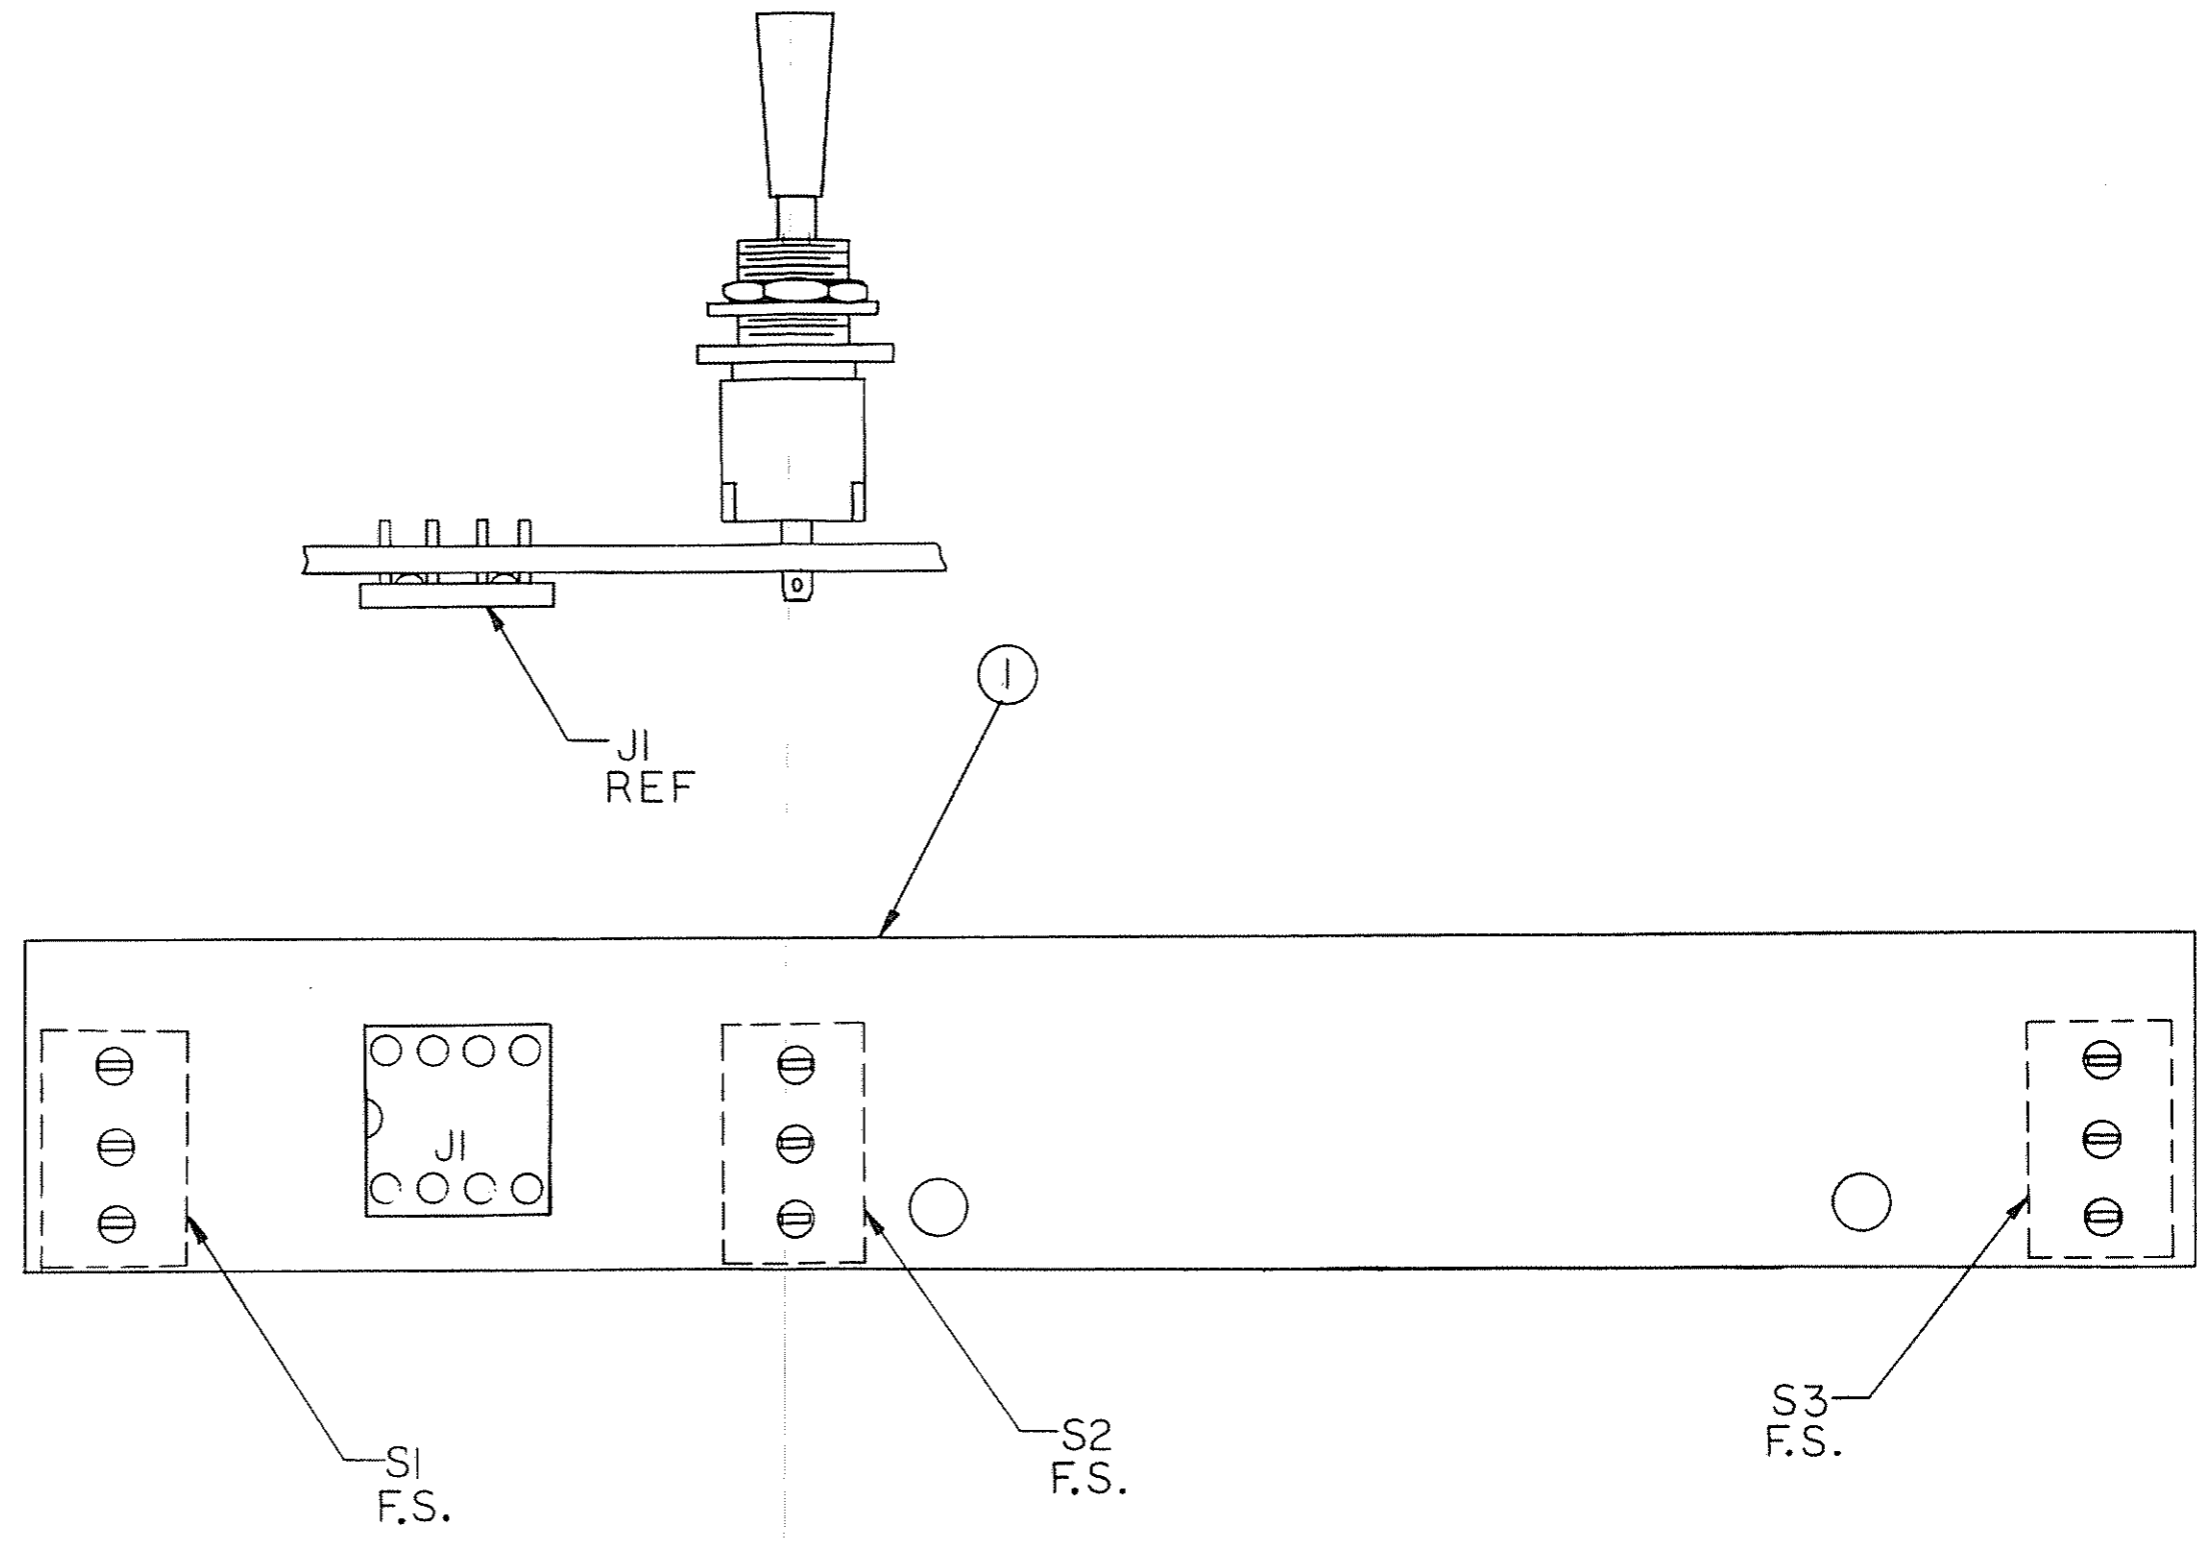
Front Panel A14 (01-80305A64) Parts Location Diagram
